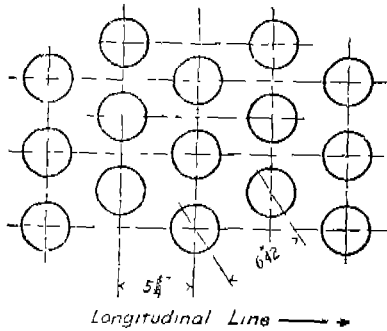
Example of Tube Spacing with Tube Holes on Diagonal Lines
